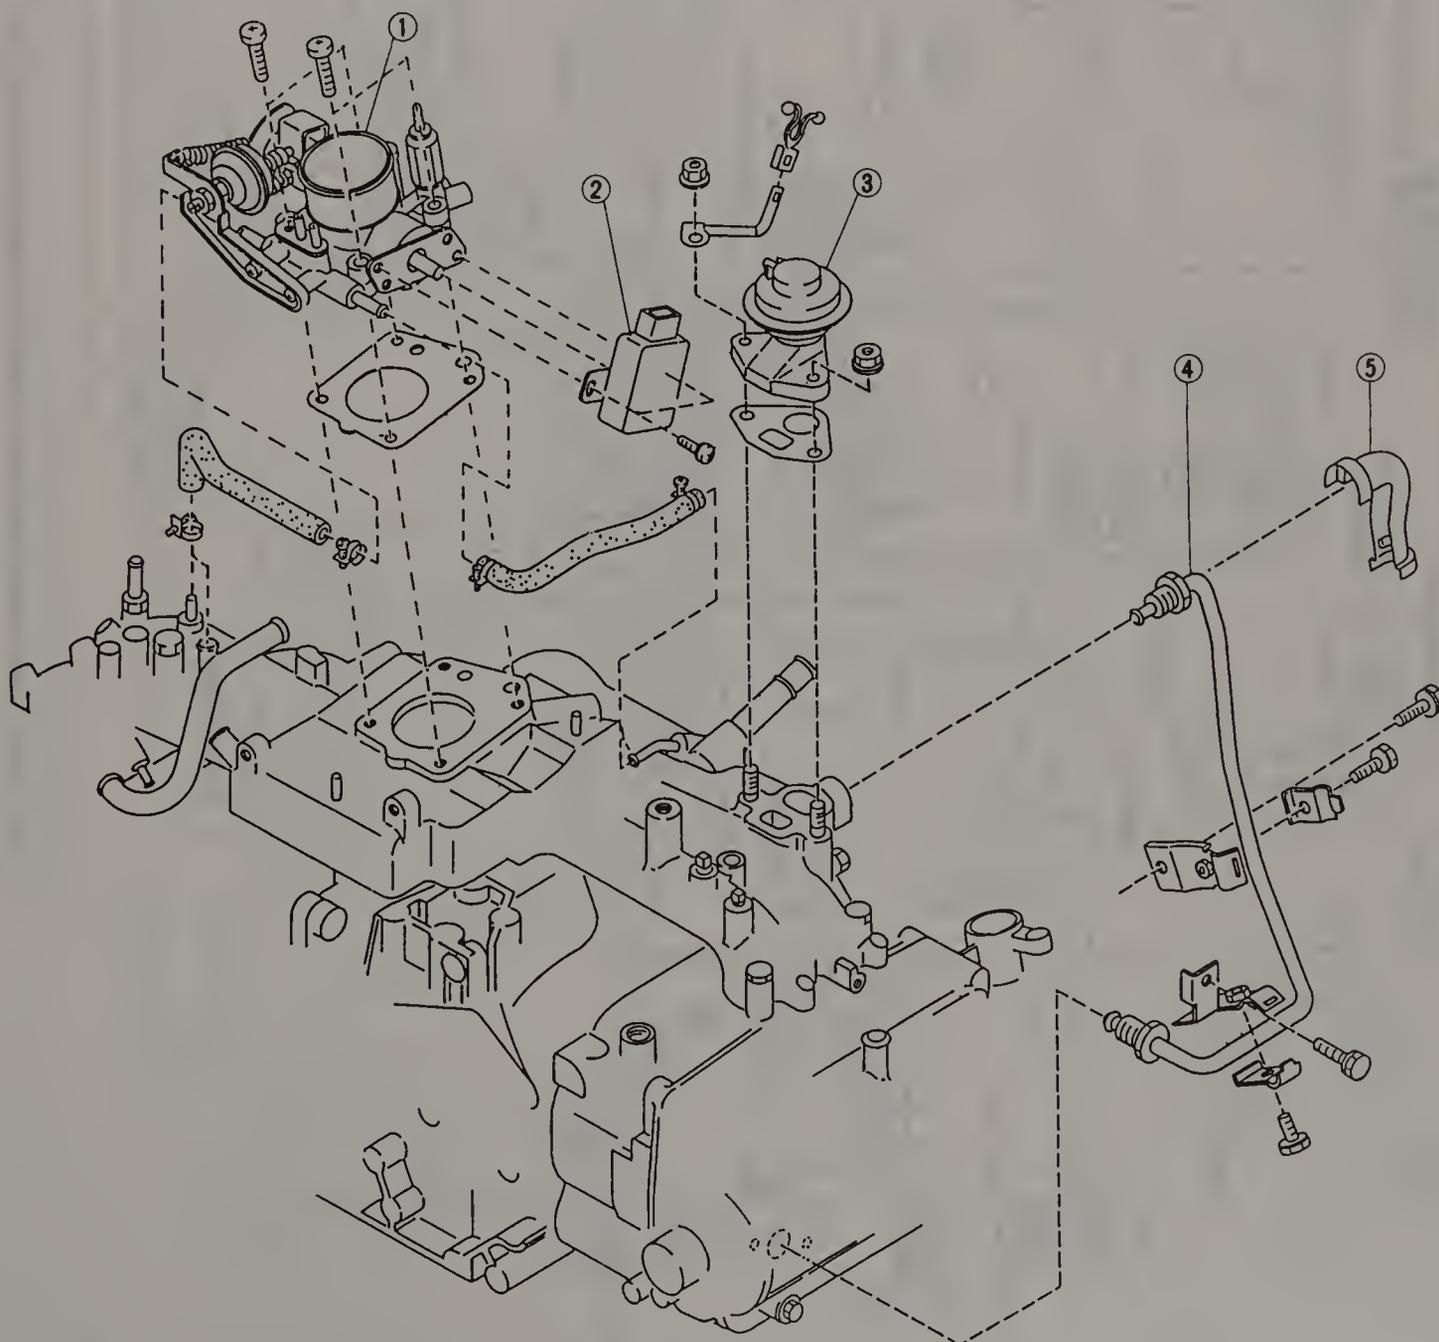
MPFI system throttle body and related components — exploded view (Sec 9)
